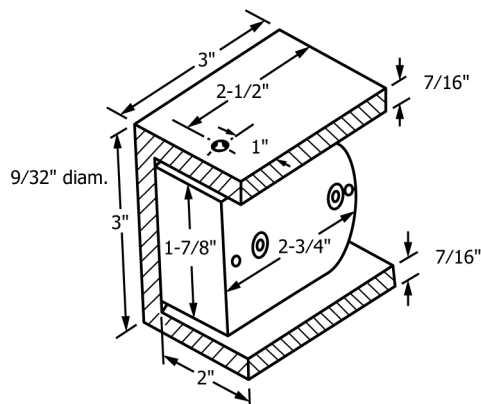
Jig for Positioning Holes in the U-Bend Specimen
